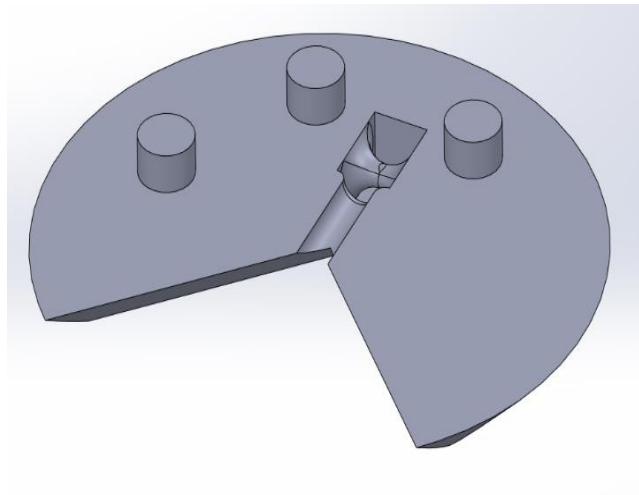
The redesigned bottom plate for the Icarus 11 as showed in SOLIDWORKS
